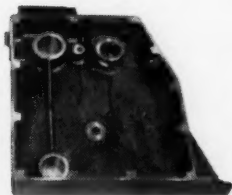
In this design, the threaded hole is countersunk and the tip of the screw is left as originally chamfered; namely, 45 degrees per side.
